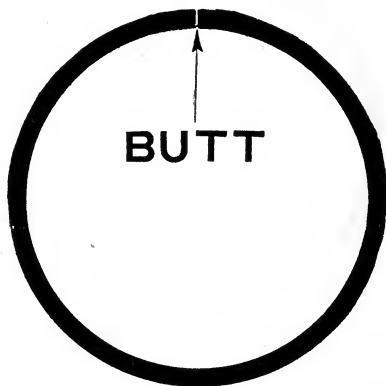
,947.—*Butt weld process.* Skelp used in making butt welded pipe comes from the rolling department of the steel mills with a specified length, width and gauge, according to the size pipe for which it is ordered. The edges are slightly beveled with the face of the skelp, so that the surface of the plate which is to become the inside of the pipe is not quite as wide as that which forms the outside; thus when the edges are brought together they meet squarely, as shown. The skelp for all butt welded pipe is heated uniformly to the welding temperature, in furnaces similar in general construction to those used in lap welding. The strips of steel when properly heated are seized by their ends with tongs and drawn from the furnaces through bell shaped dies, or rings. The inside of these dies is so shaped that the plate is gradually turned around into the shape of a tube, the edges being forced squarely together and welded. For some sizes, the pipes are drawn through two rings consecutively at one heat, one ring being just behind the other, the second one being of smaller diameter than the first. The pipes are then run through sizing and cross rolls similar to those used in the lap weld process, obtaining thereby the correct outside diameter and finish. The pull required to draw double extra strong (hydraulic) pipe by this process is so great, on account of the thickness of the skelp, that it is found necessary to weld a strong bar on the end of the skelp, thereby distributing the strain. With this bar the skelp is drawn through several dies of decreasing size, and is reheated between each draw until the seam is thoroughly welded. It is evident that the skelp is put to a severe test in this operation, and, unless the metal be sound and homogeneous, the ends will most always be pulled off.
